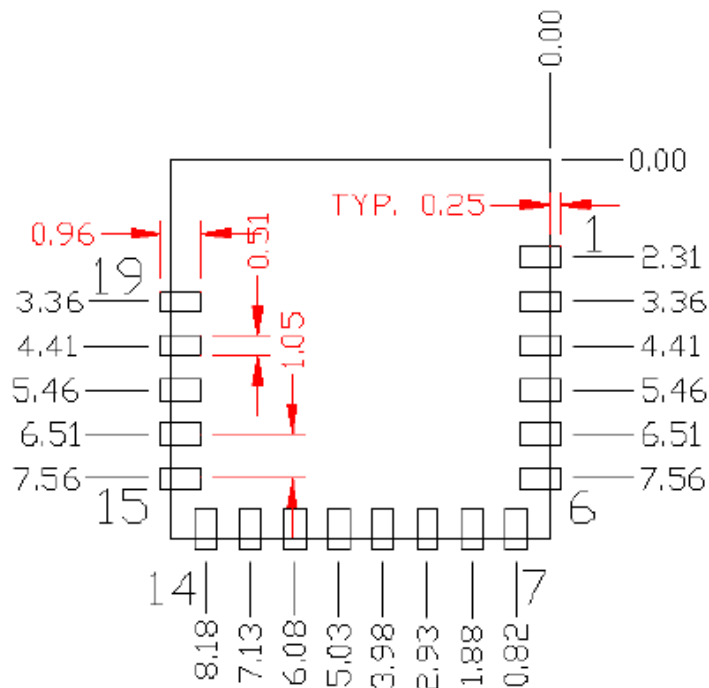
Host Board Required PCB Layout Pattern (Dimensioned View)
